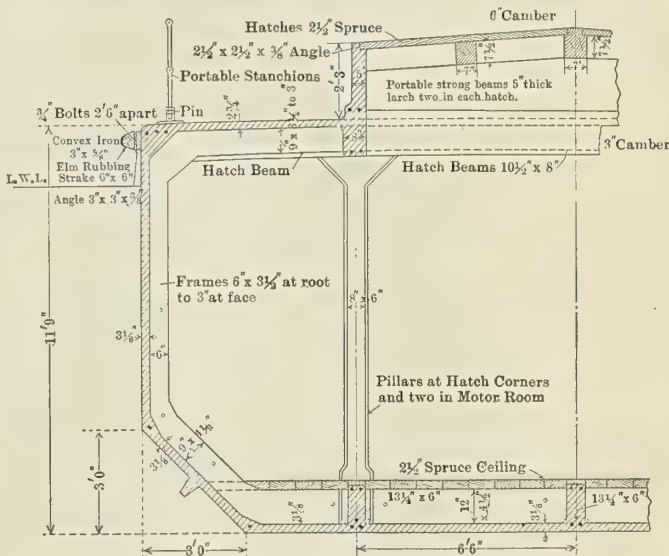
Midship Section of 125-Foot Reinforced Concrete Motor Coaster
